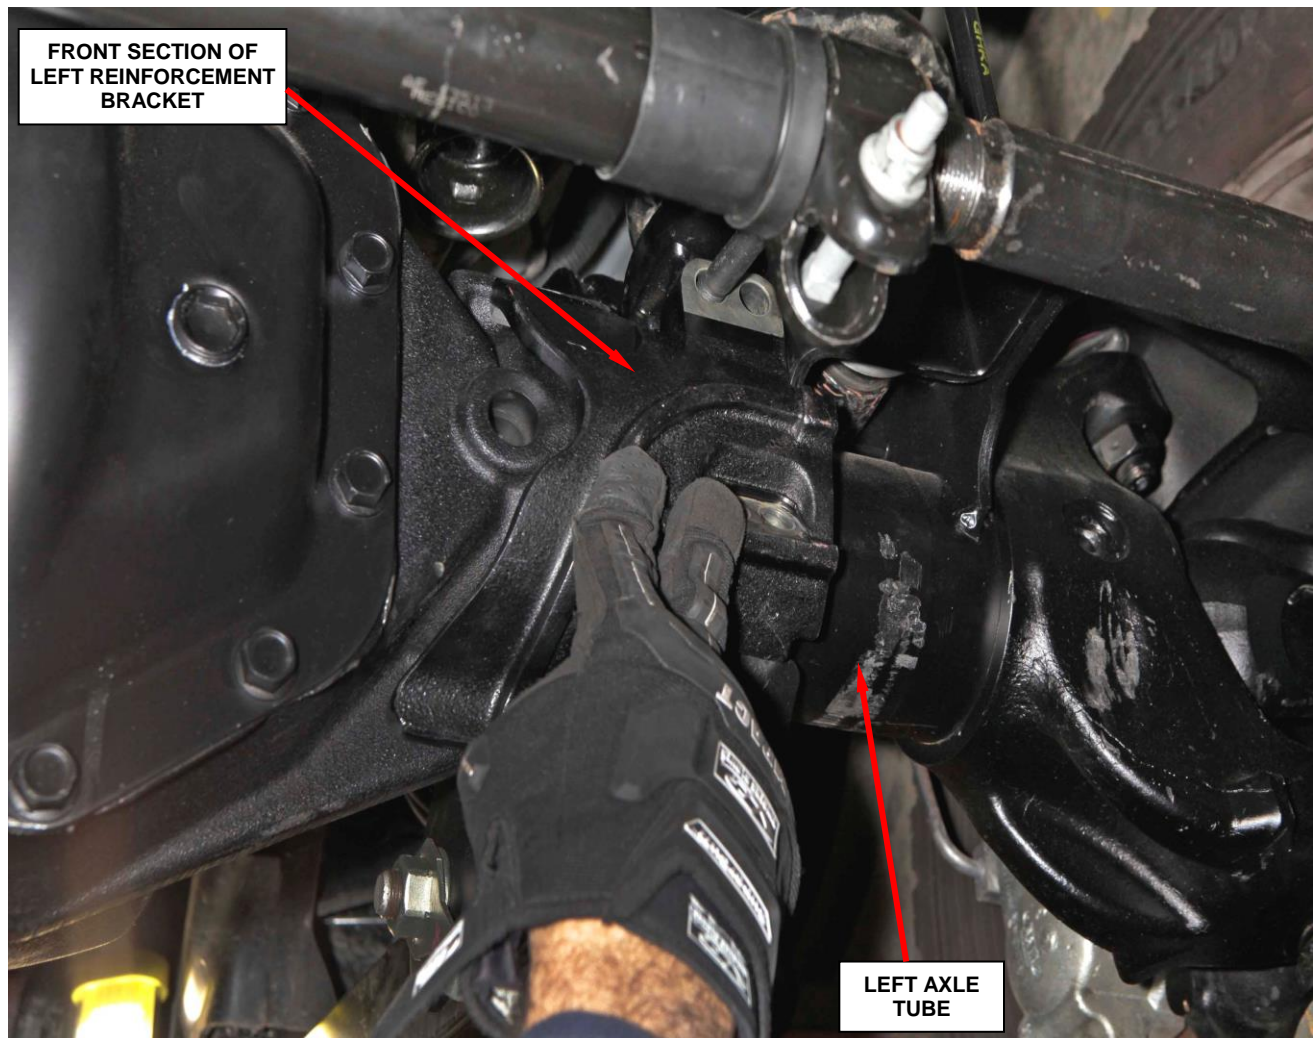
Install Left Side Top and Front Reinforcement Brackets
